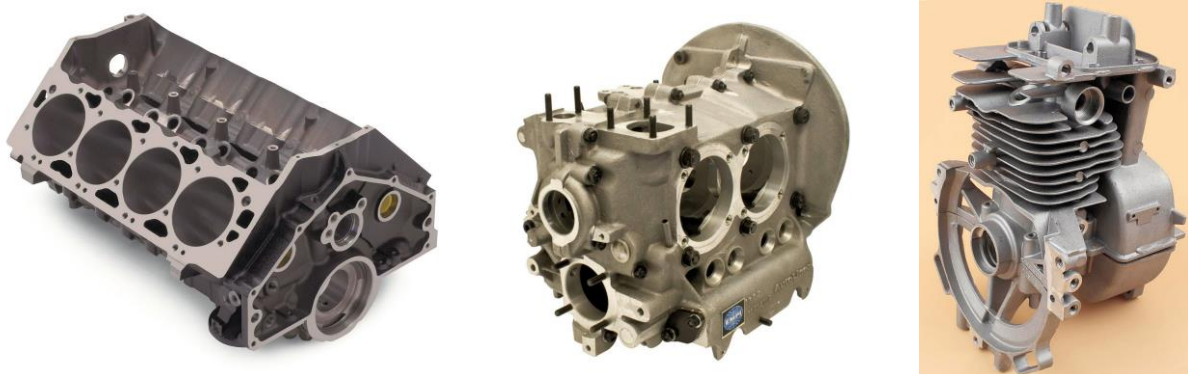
CHEVROLET 502, V8, CAST IRON ENGINE BLOCK (LEFT), VW, FOUR-CYLINDER, HORIZONTALLY-OPPOSED, ALUMINIUM CRANKCASE (CENTRE) AND A HONDA GX35, SINGLE-CYLINDER, ALUMINIUM ENGINE CASTING (RIGHT).
